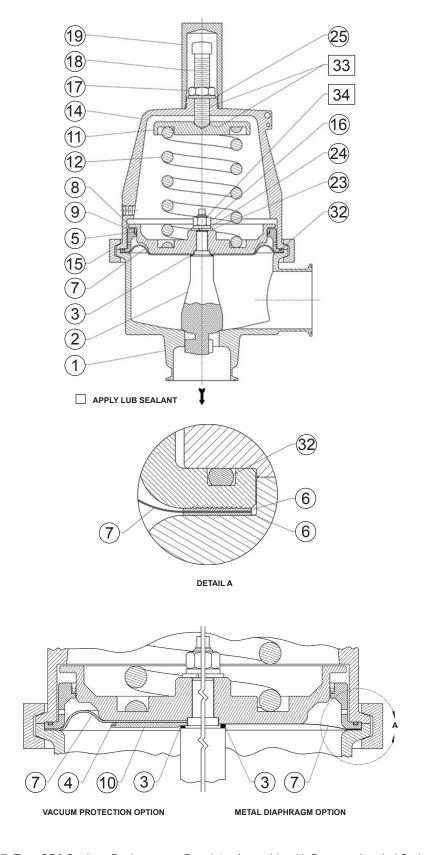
Type SR8 Backpressure Sanitary Regulator Assembly Drawing 2 and 3-Inch Sizes (DN 50 and 80)
